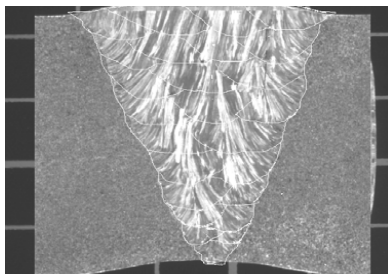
Macrograph of a multi-pass weld in a steel plate
